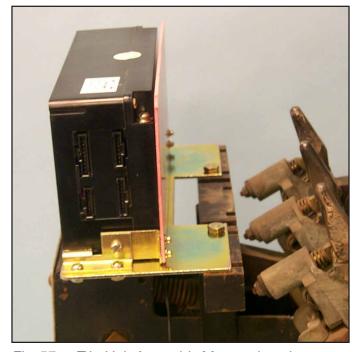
Trip Unit Assembly Mounted on the Breaker.
